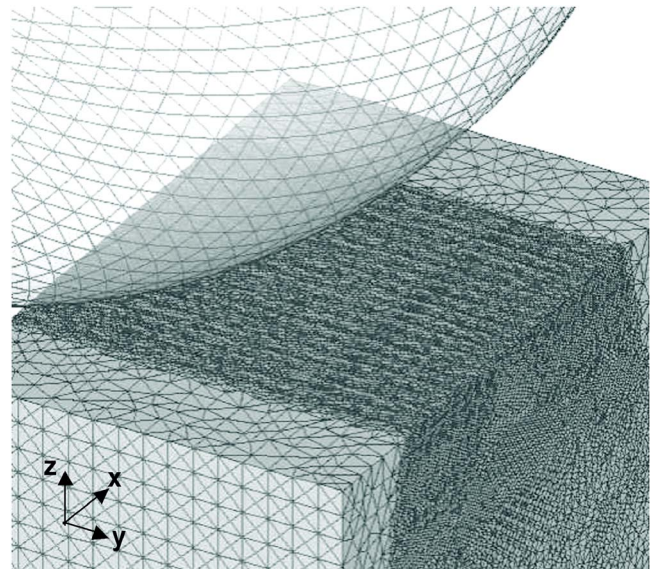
Meshes of the ball tool and the workpiece in the 3D roller burnishing simulation
